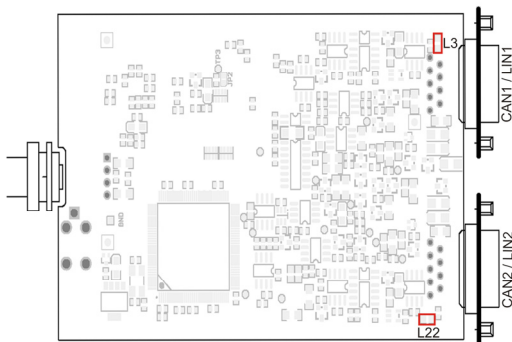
Positions of the solder fields L3 and L22 on the bottom side of the PCB of the PCAN-USB Pro adapter
